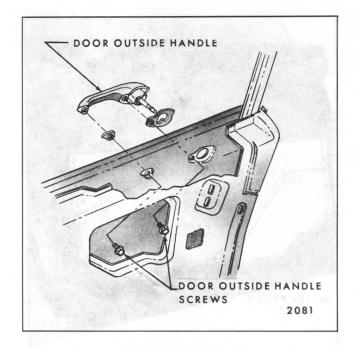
Outside Handle Removal (Push-Button Type)
